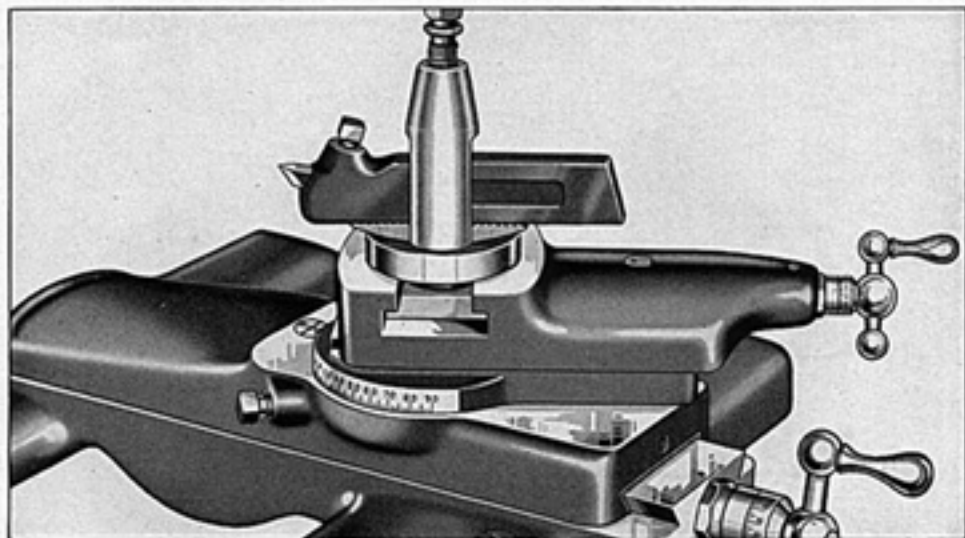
Compound rest of lathe set at  $29^\circ$  angle for cutting screw threads.
